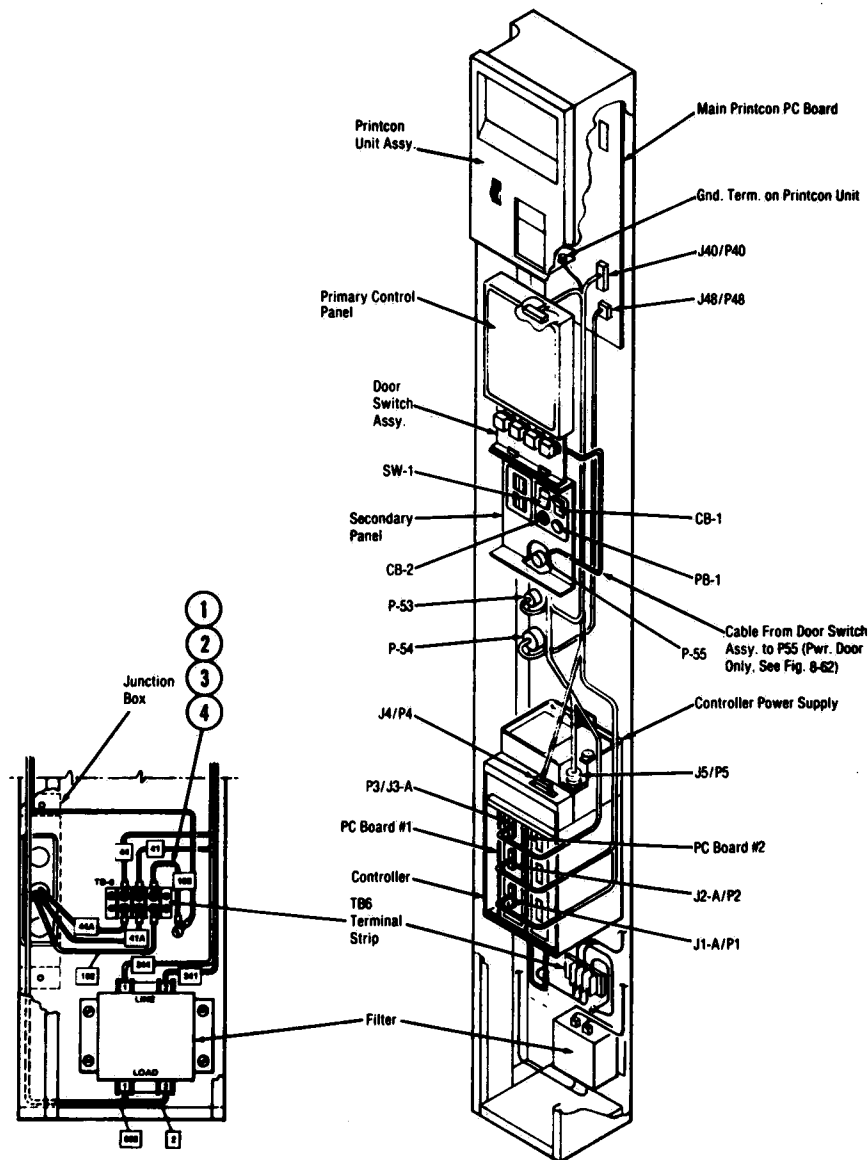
CONNECTION DETAILS: Control Column with Printcon.
